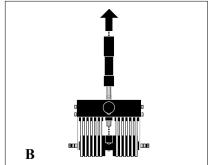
Adjusting Gate Assembly for Low-Tension
